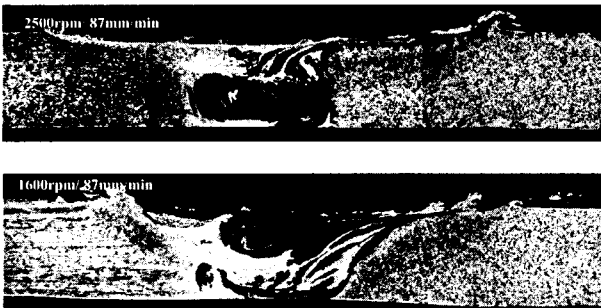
Macrostructures of butt-welded 6061 Al alloy/Cu
